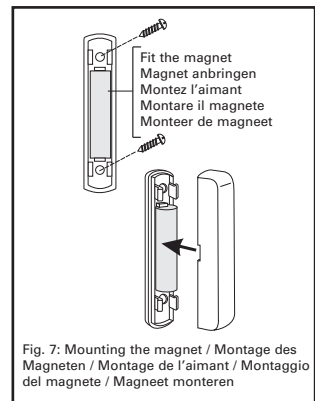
Mounting the magnet / Montage des Magneten / Montage de l'aimant / Montaggio del magnete / Magneet monteren
